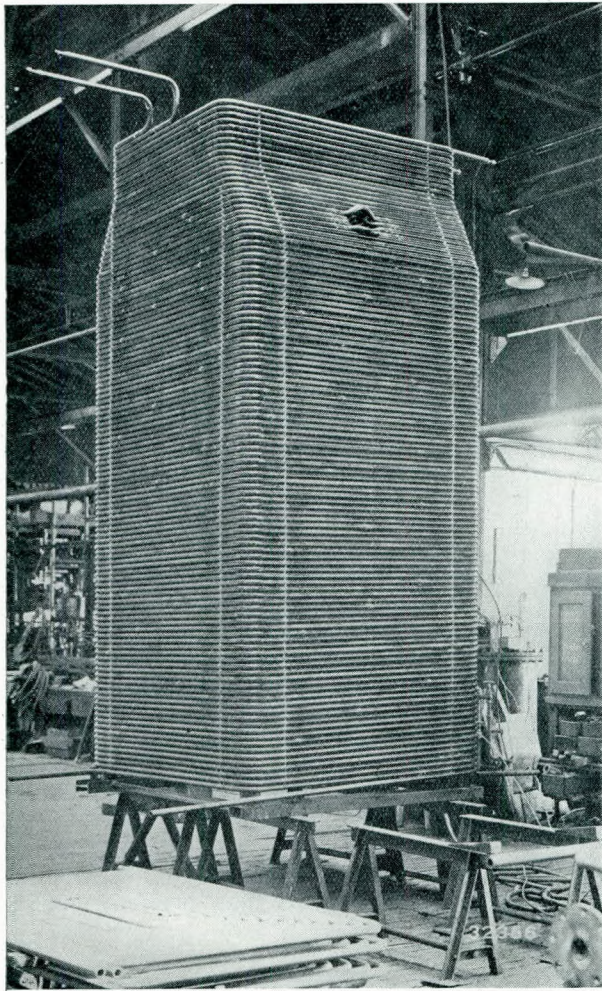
Combustion chamber for marine boiler; 23,000lb./hr. steaming rate.
